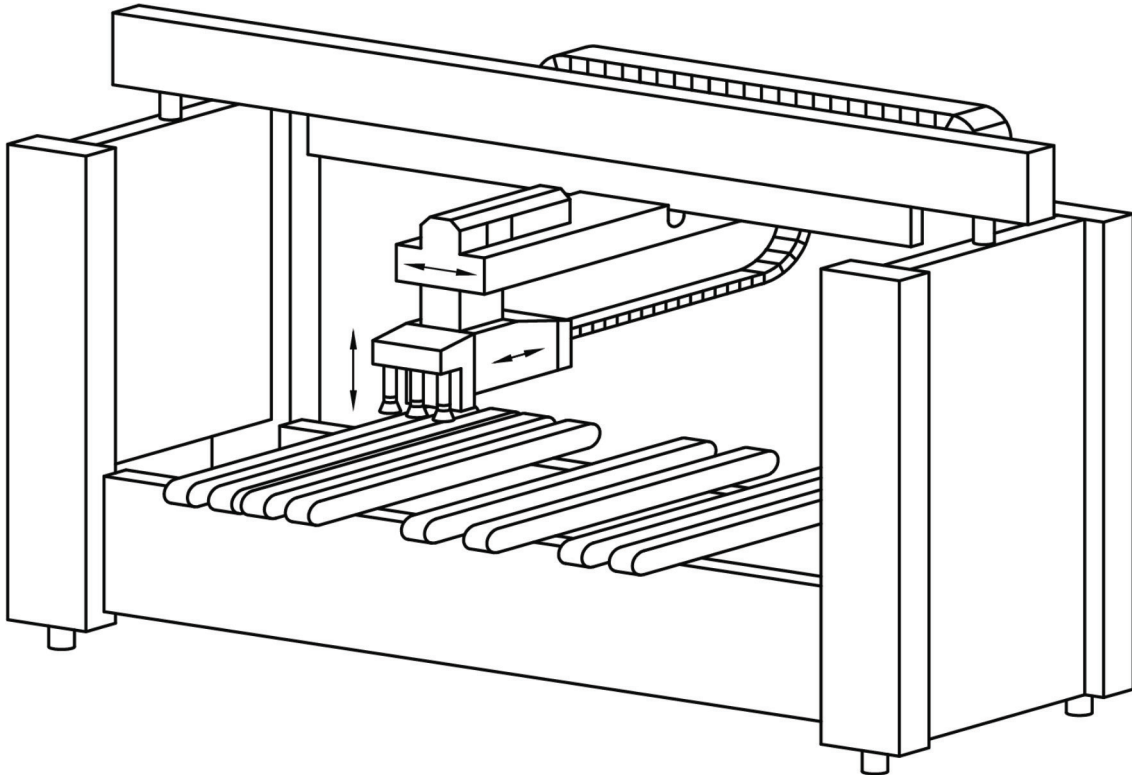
Example of portal frame machine with fixed portal, feeding belts, moving machining head
